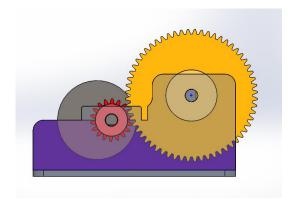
Earlier gearbox design showing motor orientation from Mark 2 (Side view).
